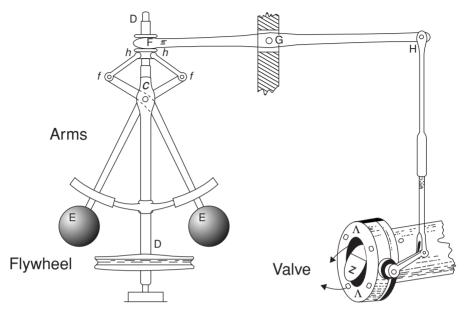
The governor James Watt designed for his steam engine. An upright spindle is attached to the flywheel. Connected to it are arms with balls which, by centrifugal force, will move further out the faster the flywheel turns. There is a linkage mechanism which ensures that the valve closes as the balls move further out, and opens as they move closer in. This ensures that steam will flow at the rate needed to keep the flywheel moving at the desired speed. Drawing reproduced from J. Farley (1827), A treatise on the steam engine: Historical, practical, and descriptive. London: Longman, Rees, Orme, Brown, and Green, p. 436.
